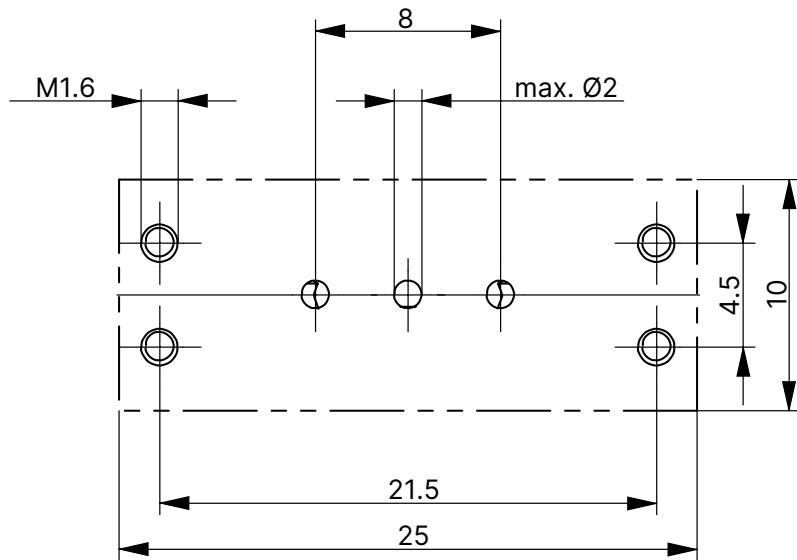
Installation drawing for Bürkert flange – Hole pattern
